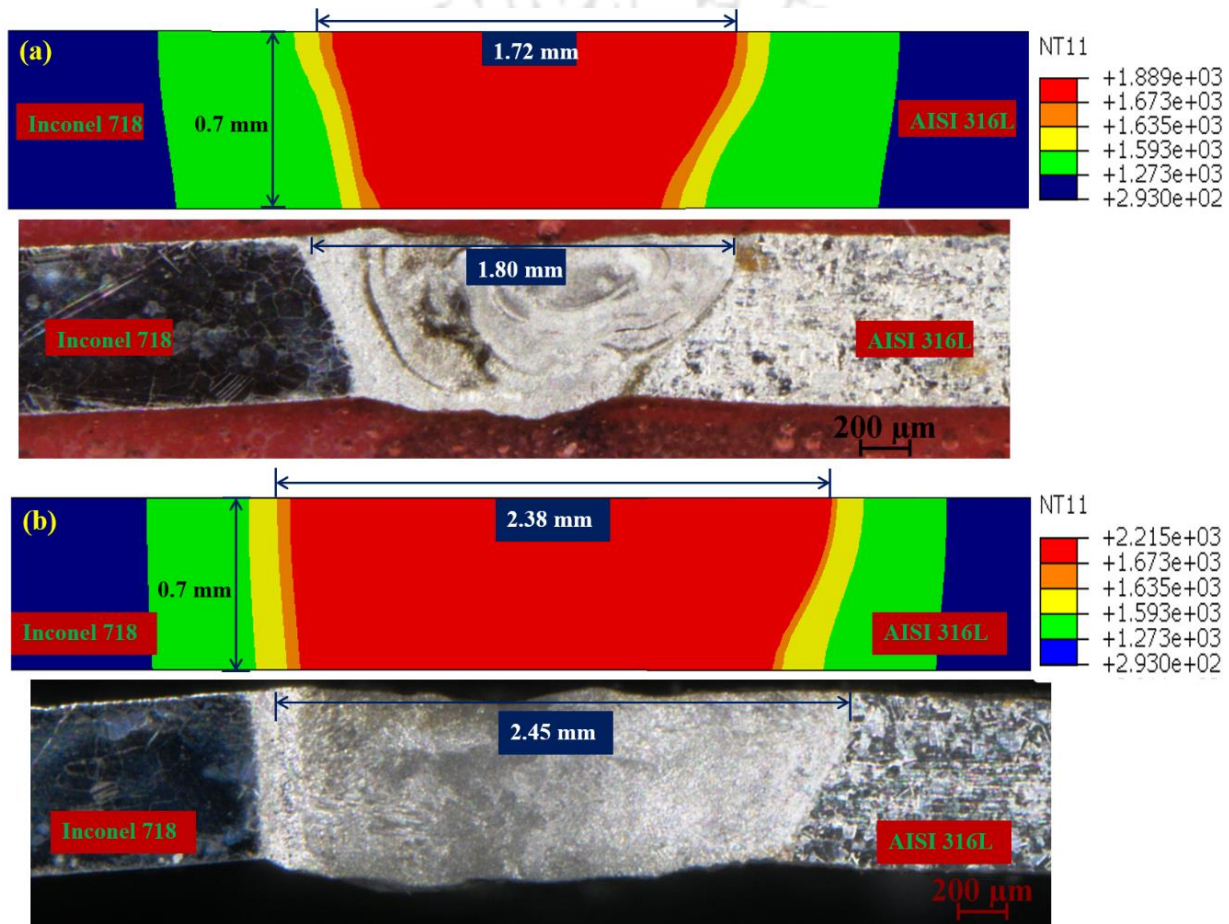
Simulated and experimental weld bead profile of the (a) PD1 and (b) PD5 welding conditions
